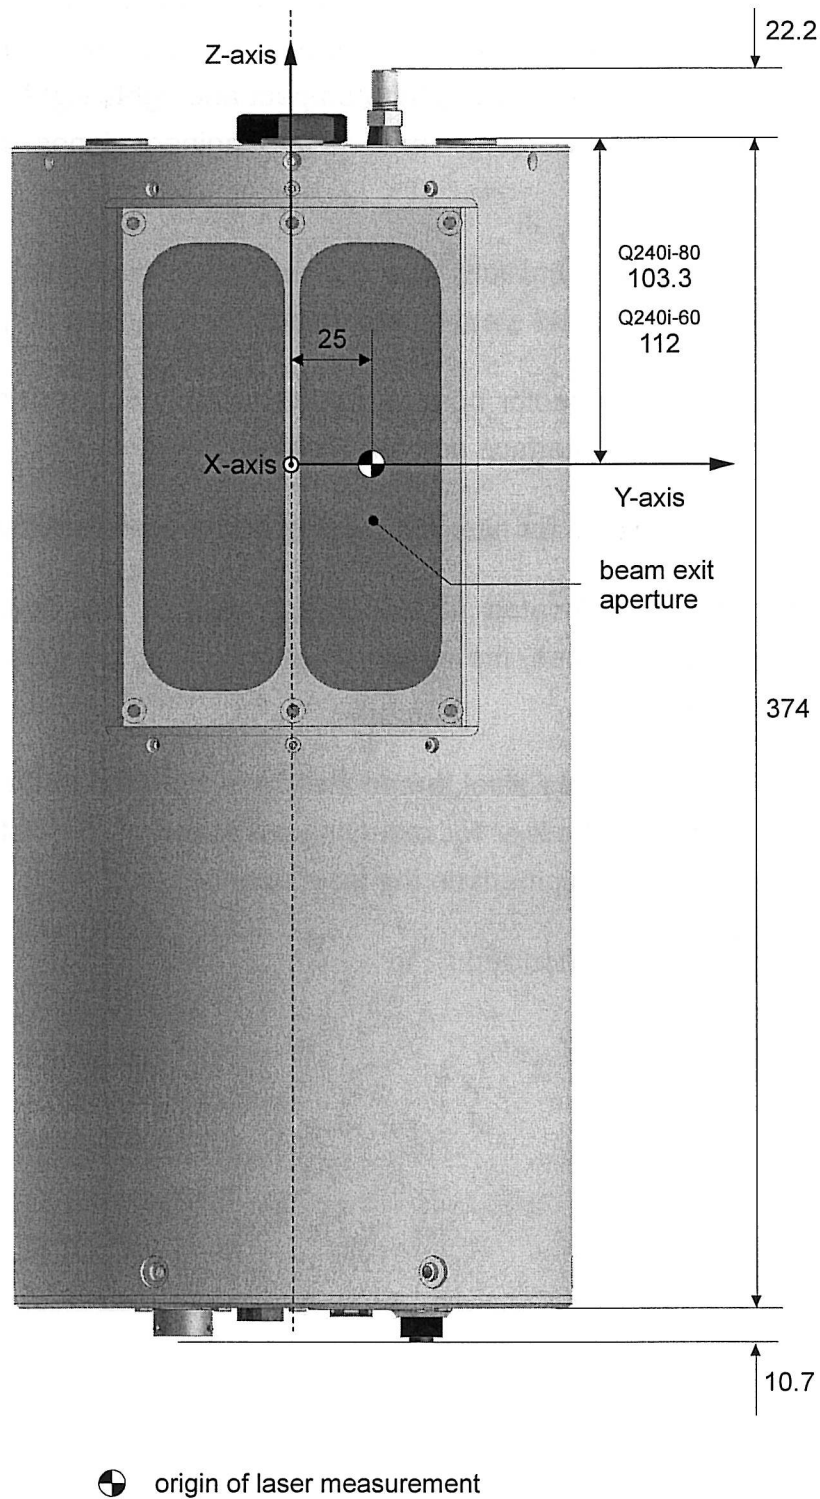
Bottom view of LMS-Q240i, all dimensions in mm
